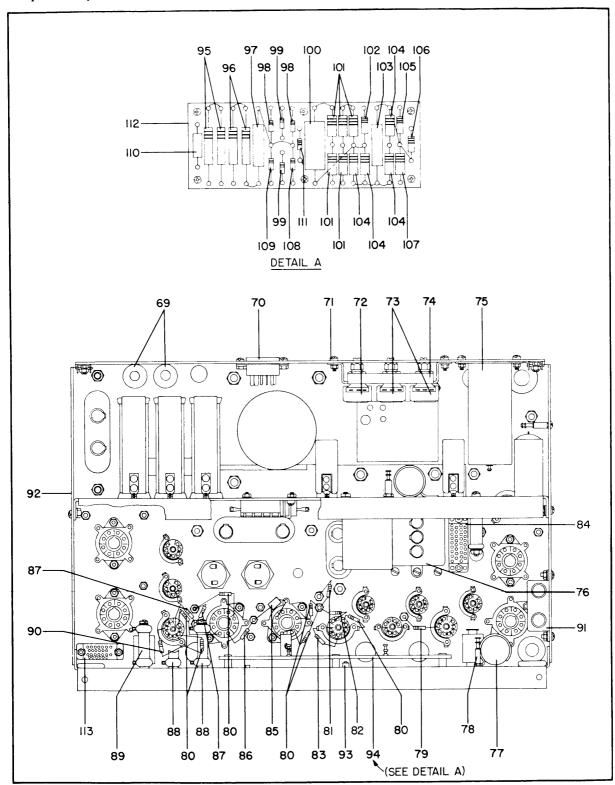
Power Supply Chassis Assembly, Bottom View (Sheet 2 of 2 Sheets), Index Nos. 69 through 113 140
